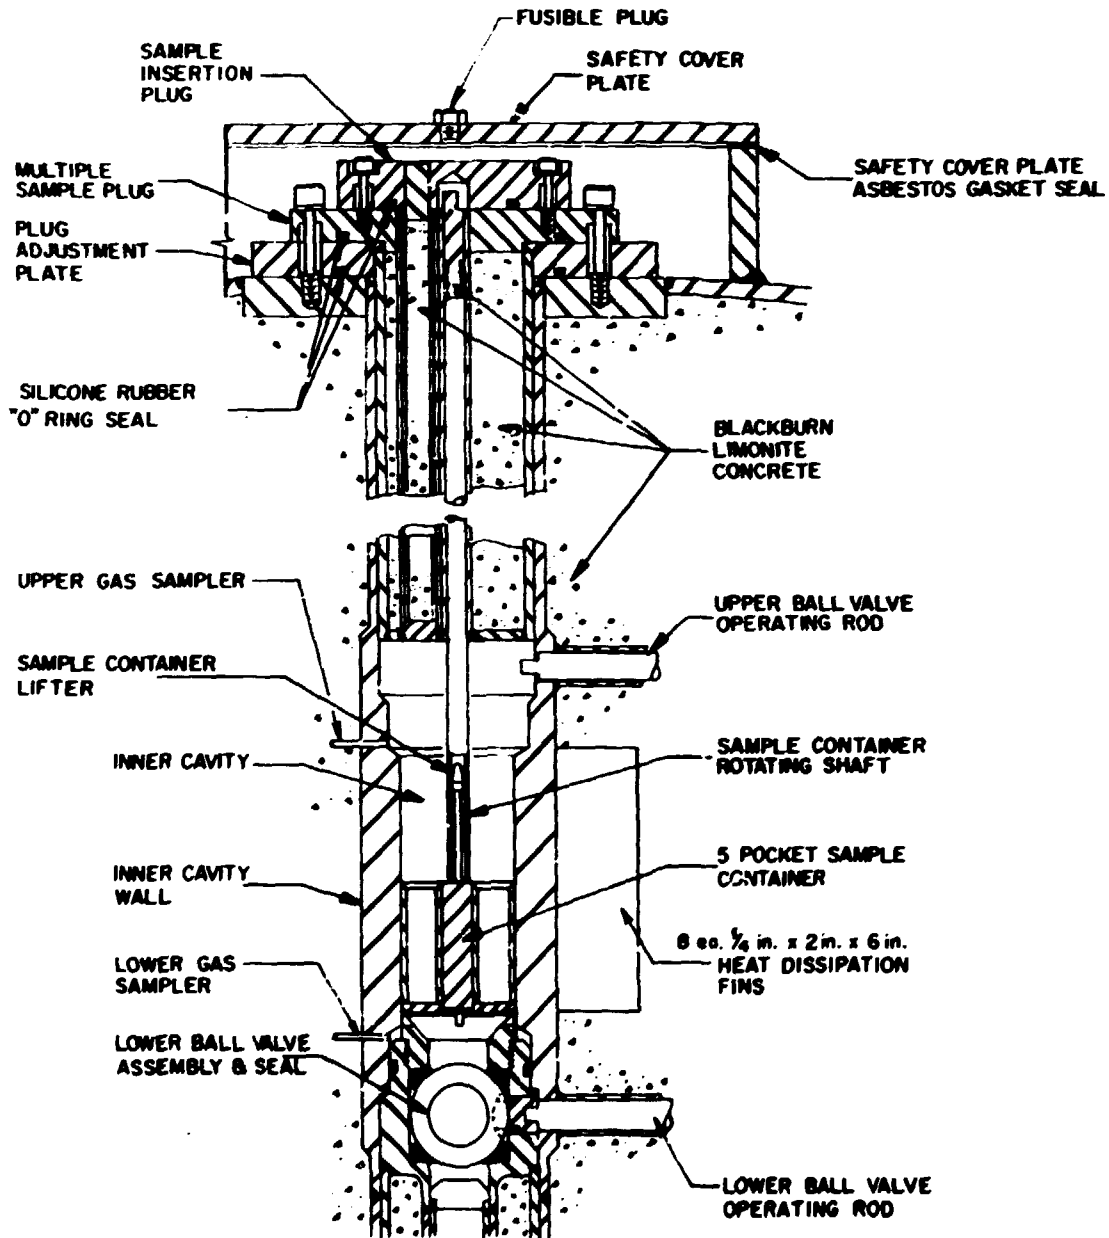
Plug and sample container to permit multiple-specimen shipment (maximum, five specimens), showing plug and seal arrangement.
